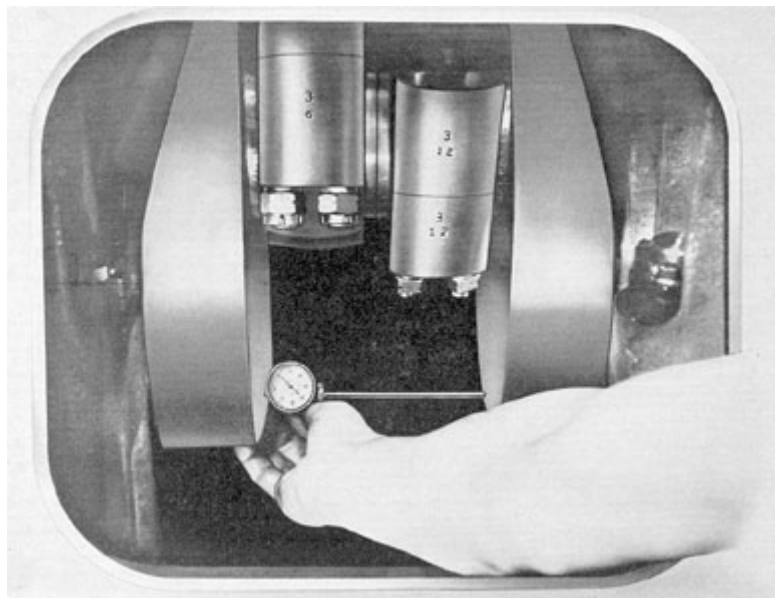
Measuring crank cheek deflection with a strain gage.
